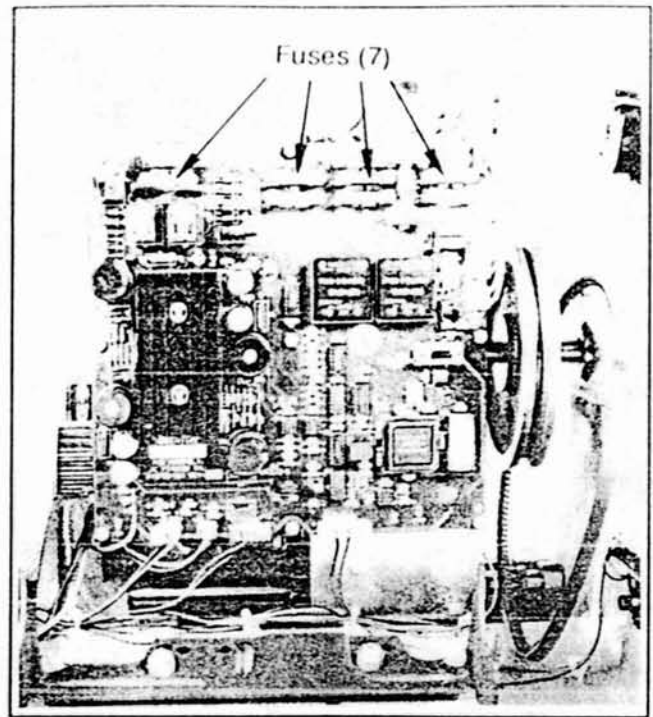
Fuses F1-F7 on TMU PCB Assembly
